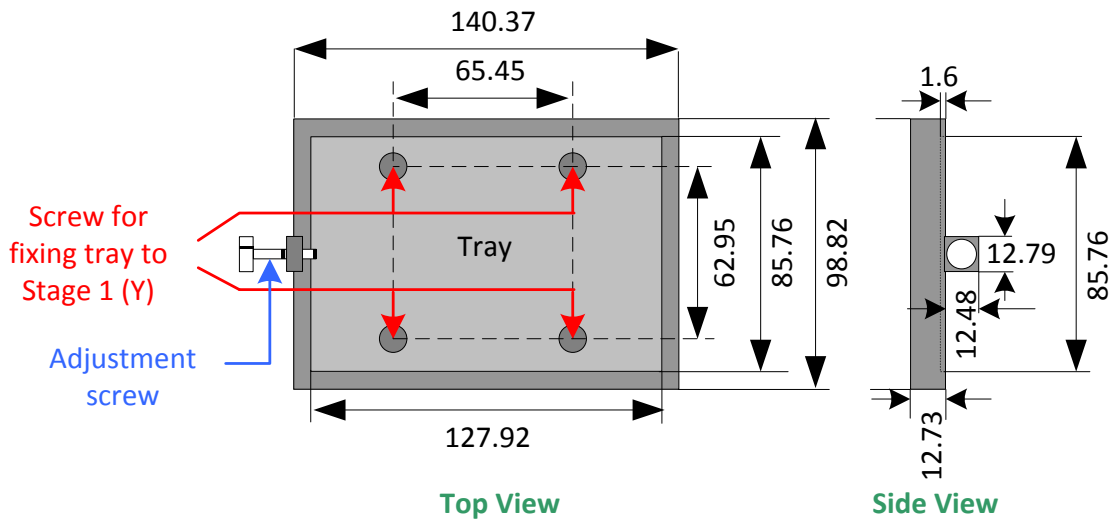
Drawing of the design of the holding tray (all dimensions in mm).
